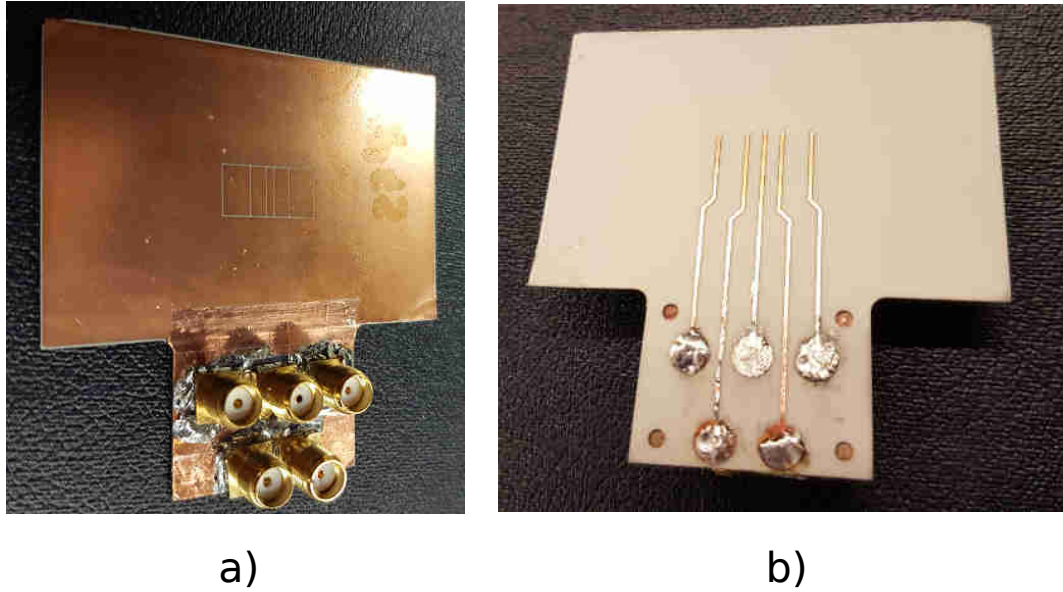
a) Top and b)bottom of the P.W.Circuit Chip with SMA connectors soldered to the pads.
